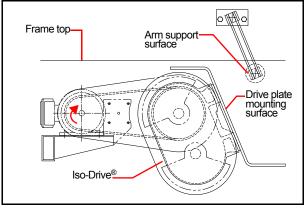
Drive Plate Mounting Surface and Arm Support Surface are Parallel
